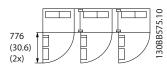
Space in front of IP21/IP54 enclosure type, frame size F14
